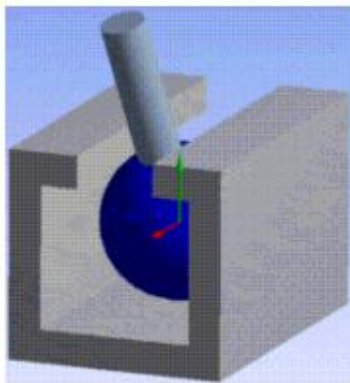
7b Revolute Joints (Piston pin to Connecting Rod )
